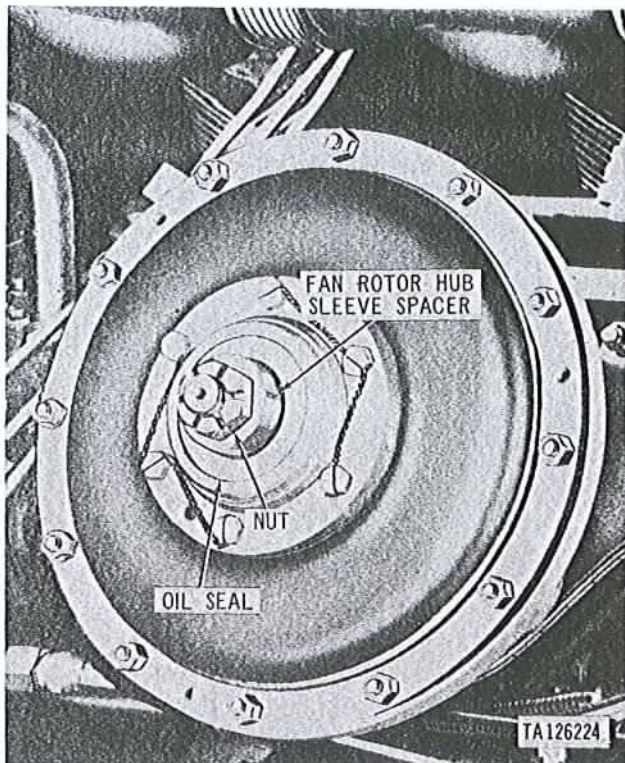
Fan drive housing fan rotor hub sleeve spacer installed for leakage test.
